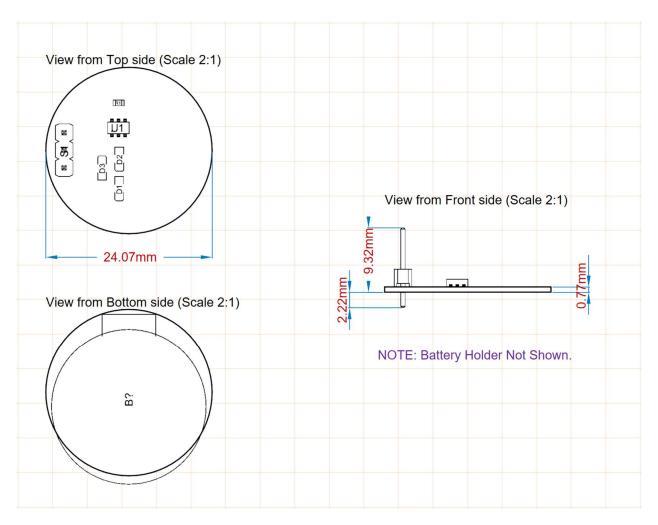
, Package outline and Mechanical Views of S01401 (battery holder not shown)
